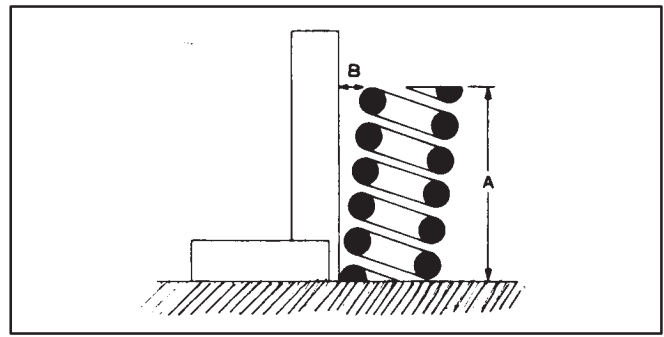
MEASURING VALVE SPRING HEIGHT AND SQUARENESS
